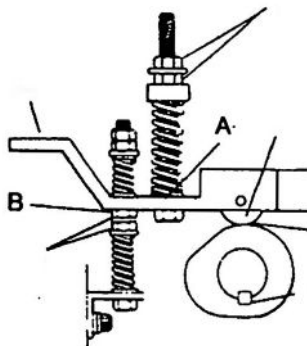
ADJUSTING TENSION LEVERTENSION ROLLERS
